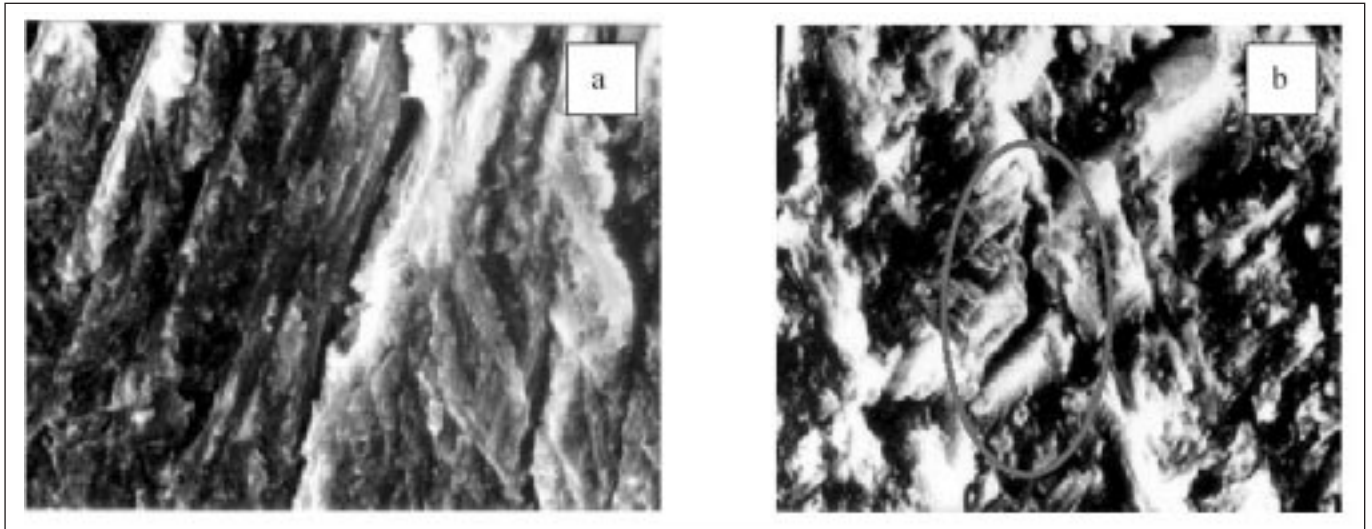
SEM fractographs of the welded material. (a) Brittle fracture (b) Microcrack.
